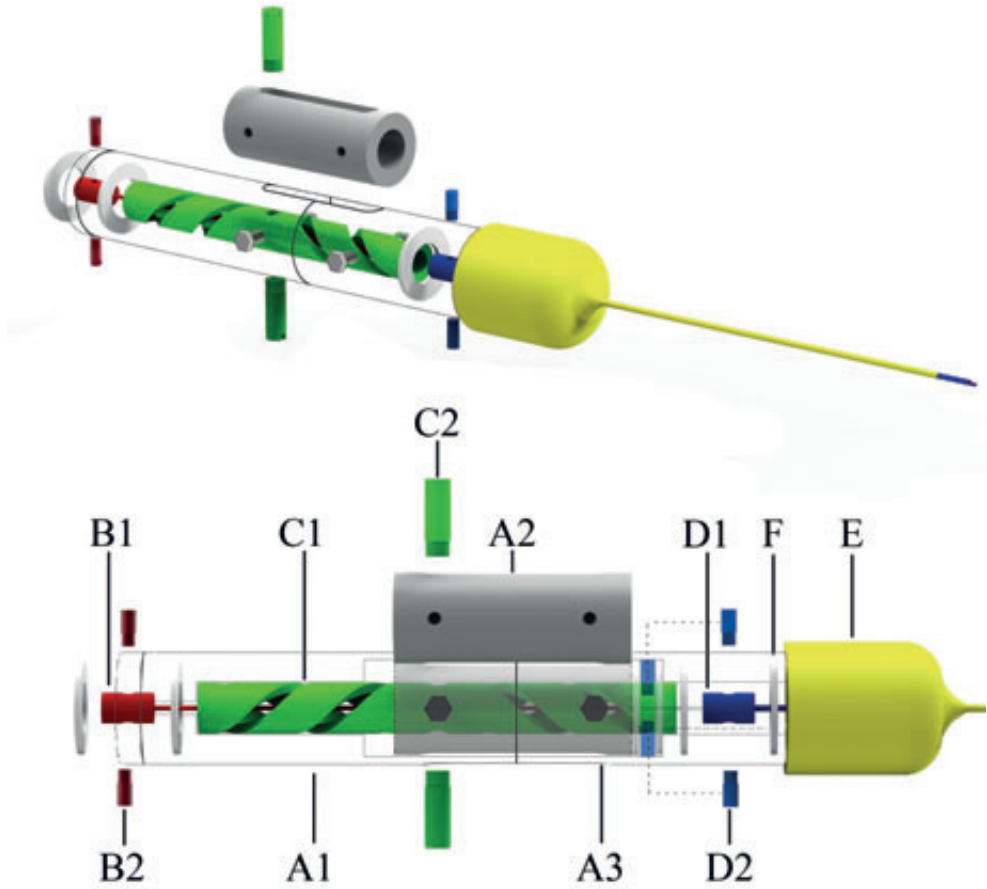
Biopsy Needle Handle Design – Exploded View. Top row: perspective view, Bottom row: side view. Letter indications: A1: bottom tube, A2: middle tube, A3: top tube, B1: inner bearing connected to the inner cutting blade, B2: cylindrical protrusions, C1: helical tube, C2: control rods (2x), D1: outer bearing connected to the outer cutting blade, D2: cylindrical protrusions, E: cap connected to the cannula, and F: nylon rings (4x).
